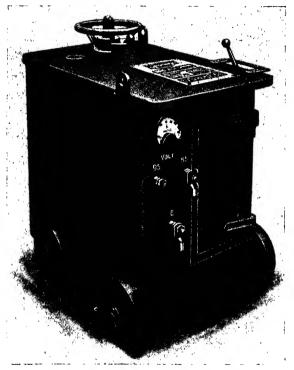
MULTI-OPERATOR WELDING SET
